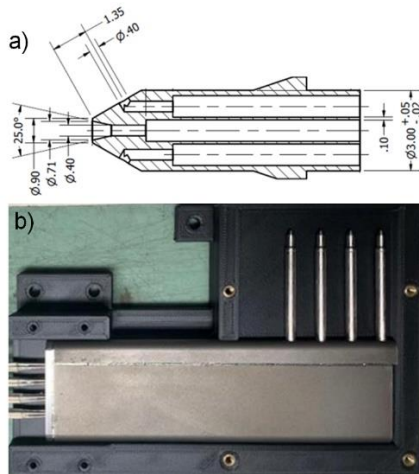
a) Five-Hole Probe Head Perpendicular Cone Design. b) Four-Head Five Hole Probe Rake.
